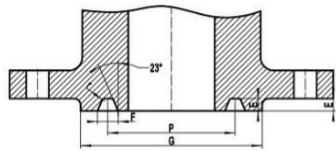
the ASME B16.5 flange with a ring-type joint (RTJ) facing. P – pitch diameter of groove; G – minimum diameter of raised portion; F – upper width of groove; r – radius at bottom of groove; E – depth of groove, equal to height of raised portion; 23°: slope angle of side wall.
